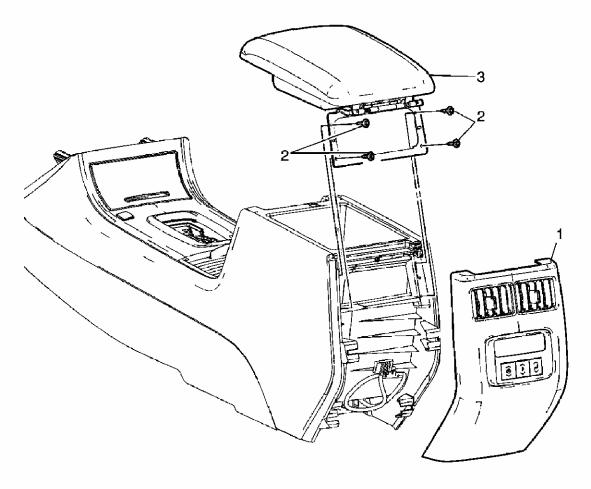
View Of Console Armrest - Front Floor Courtesy of GENERAL MOTORS CORP.
